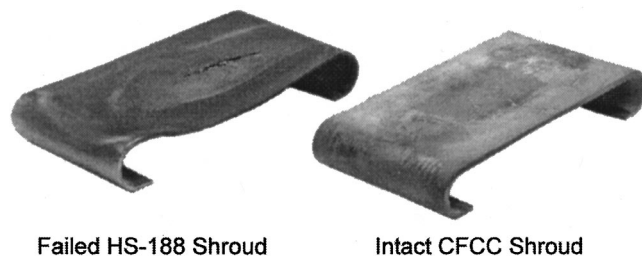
Photograph of turbine shroud components following combustion rig testing
